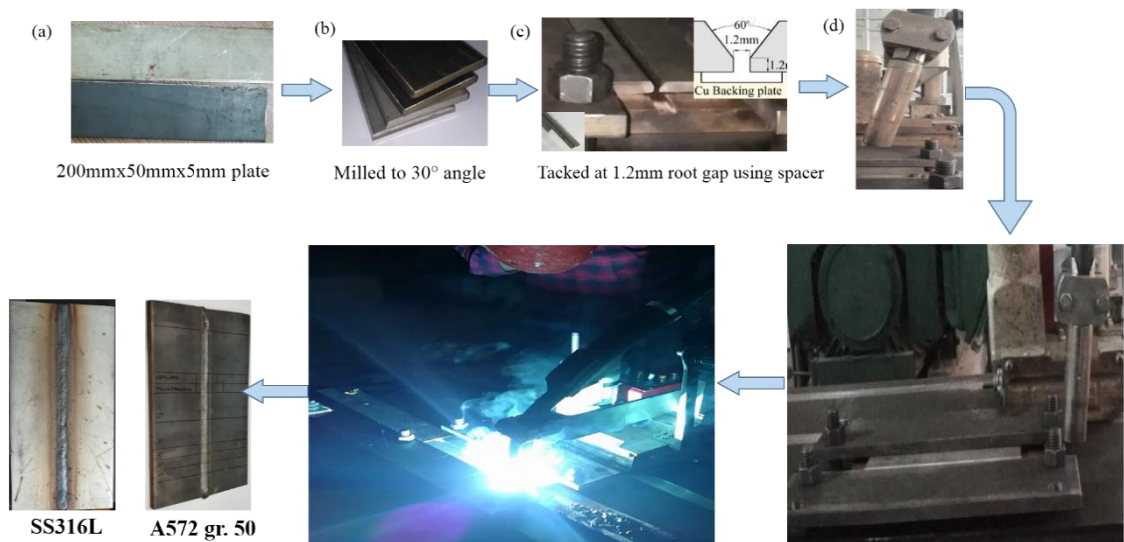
Steps followed during fabrication a) Cleaned base b) Milled specimen, c) joint configuration, d) fixed 10° torch angle, e) Start of Welding, f) GMAW
